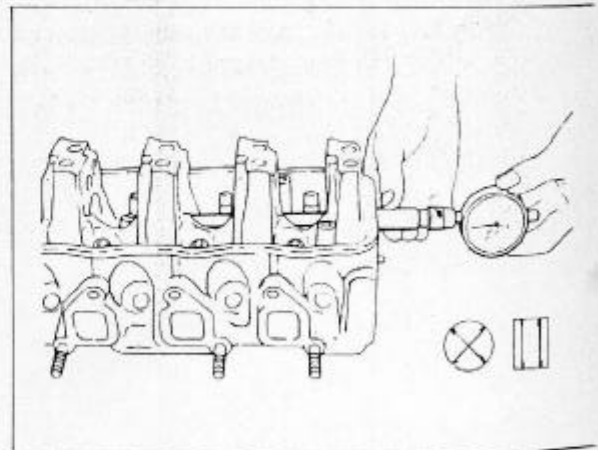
A — 51 MEASURING BORE DIAMETER OF JOURNAL PART
